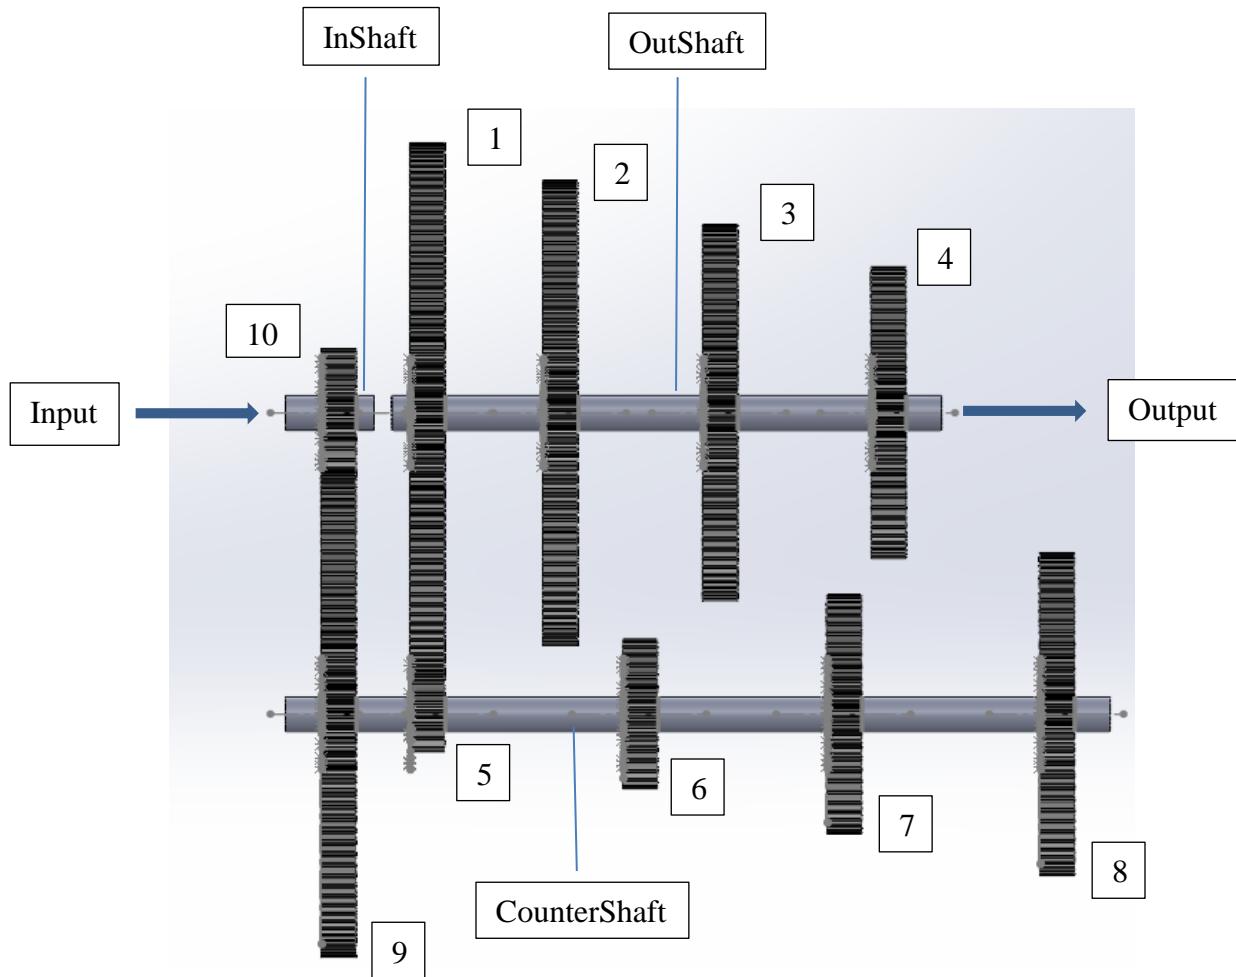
Initial transmission design with shafts and gears. Labels with names included.
